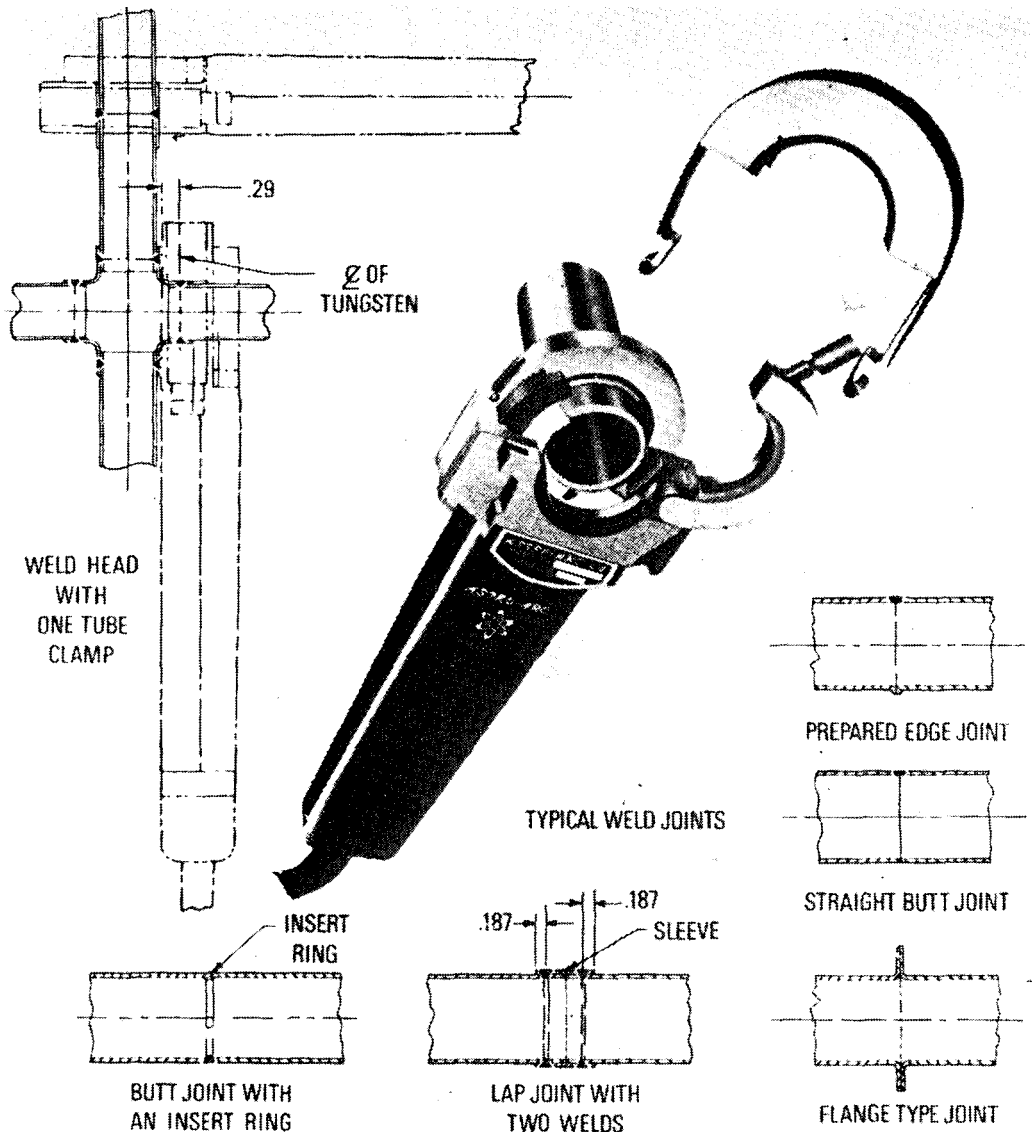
ORBITAL WELDING HEAD FOR AUTOGENOUS TUNGSTEN-INERT-GAS WELDING
